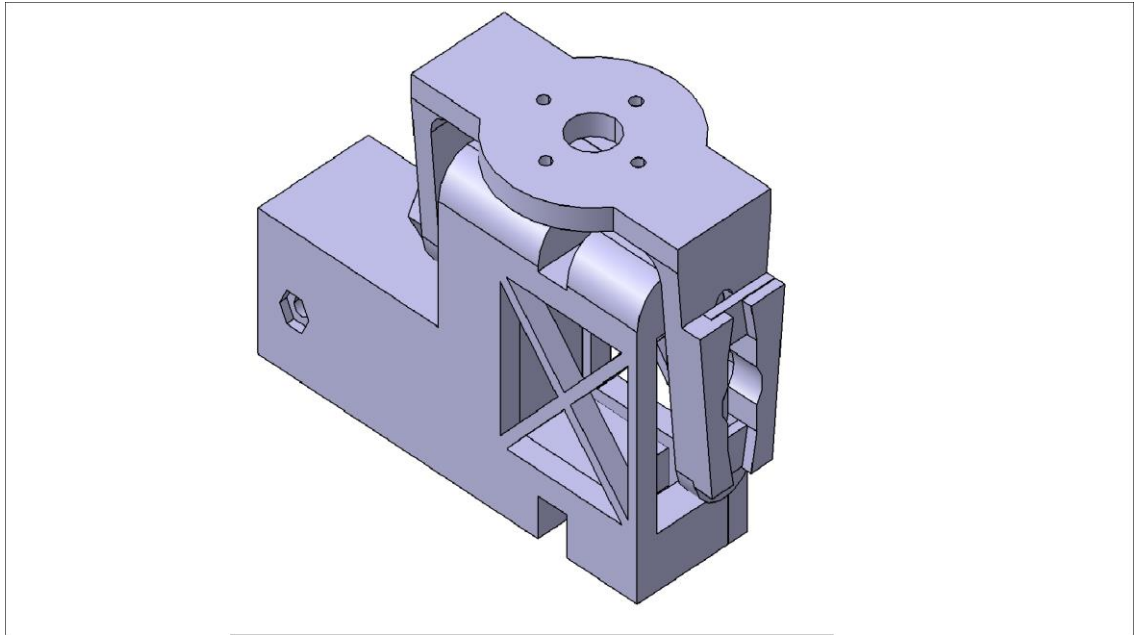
6 Connecting Platform to Attach BLDC Motor Directly to Servo Shaft
